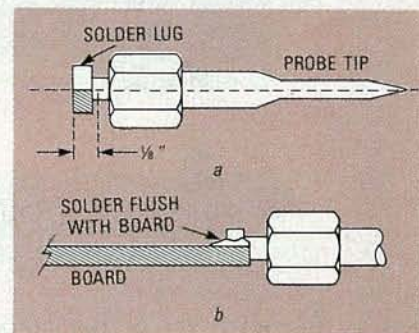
TO MOUNT THE LOGIC PROBE TIP onto the frequency probe PC board, file 1/8-inch of the bottom of the hex-nut-shaped solder lug flat down to the centerline of the logic probe tip. Then, solder it flush to the correct pad on the component side of the PC board.
